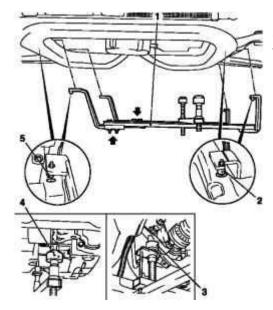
Installation of a special device KM-6001-A on the housing front axle: 1 - a special device, 2, 5 - neck, 3 - rear support 4 - front support
